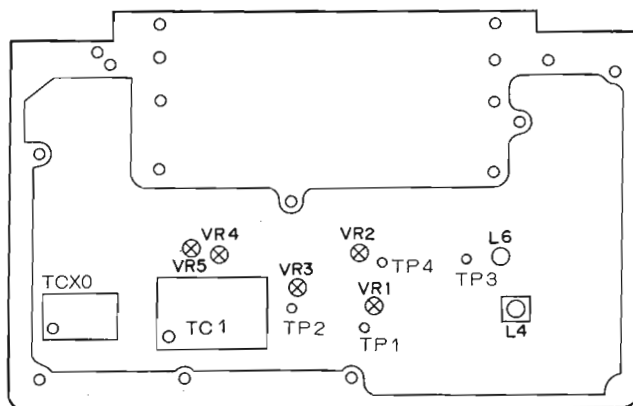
1200 MHz band adjustment: Component layout (upper view)
